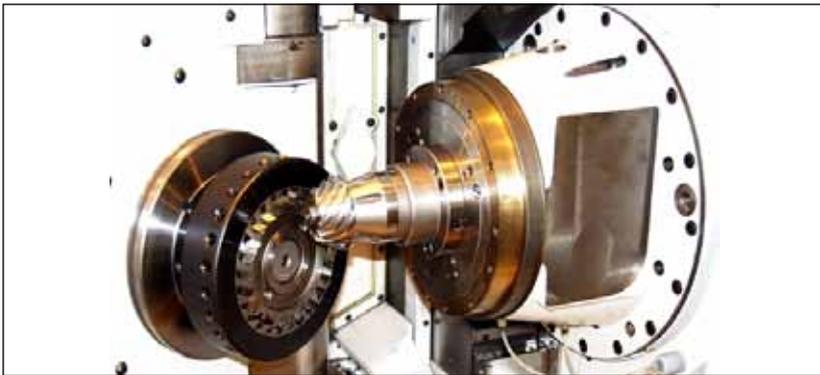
Hypoid pinion cutting with face hobbing cutter (continuous process).
